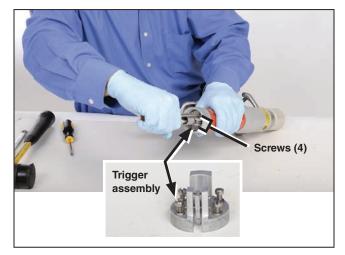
Remove the four screws securing the trigger assembly to the inner tube assembly. Remove the trigger assembly.
